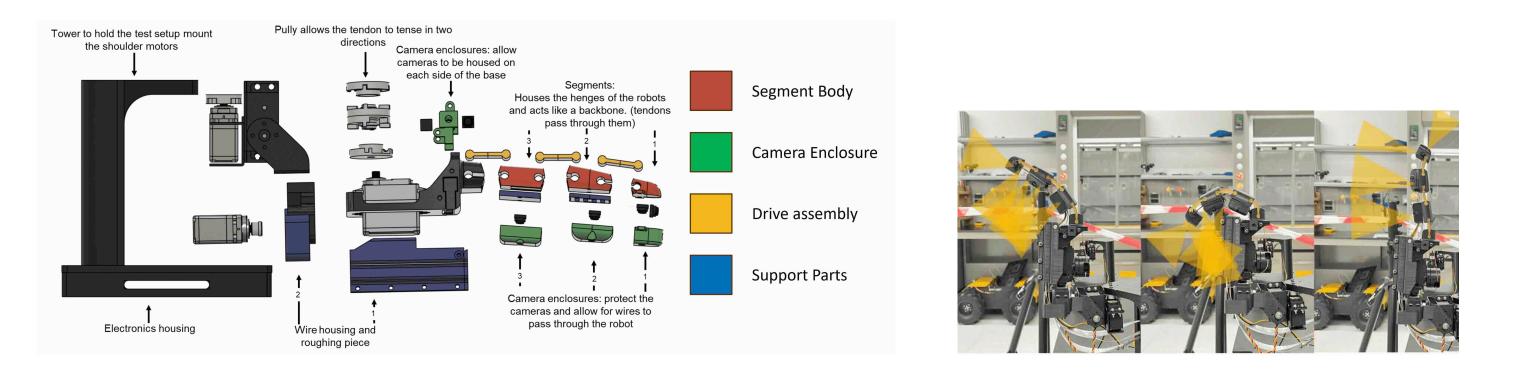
Exploded view of the second prototype showing the drive assembly (yellow), segment (red), camera enclosure (green), and the routing and management components (blue).
